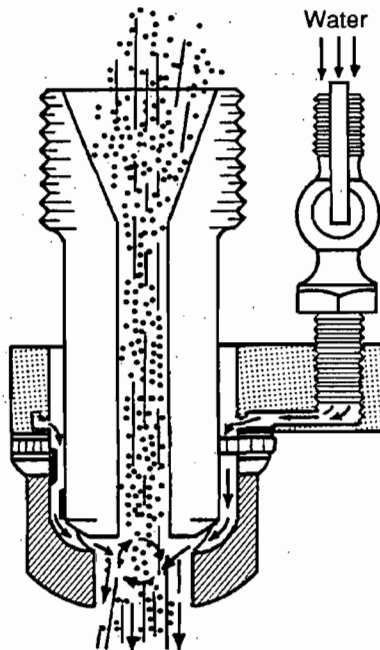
Adapter nozzle converting a dry blasting unit to a wet blasting unit.
